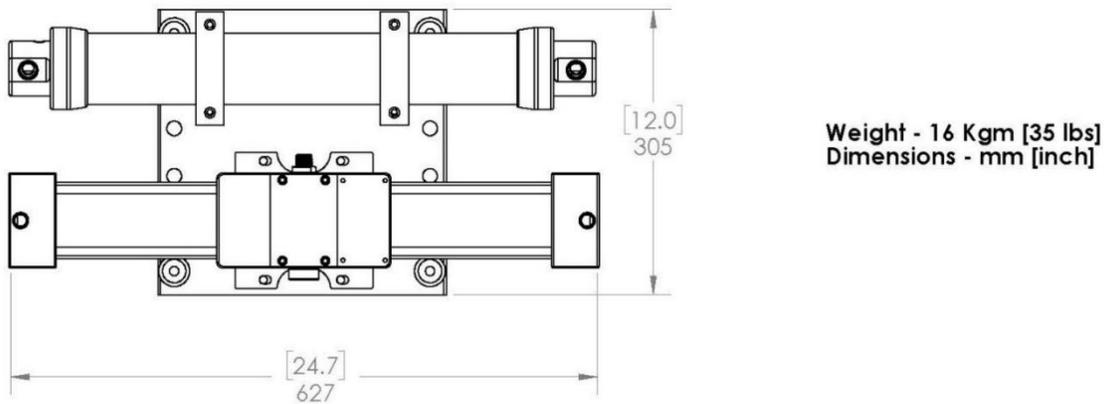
High Pressure Module, Dual 21" Membrane Dimensions and Weight
